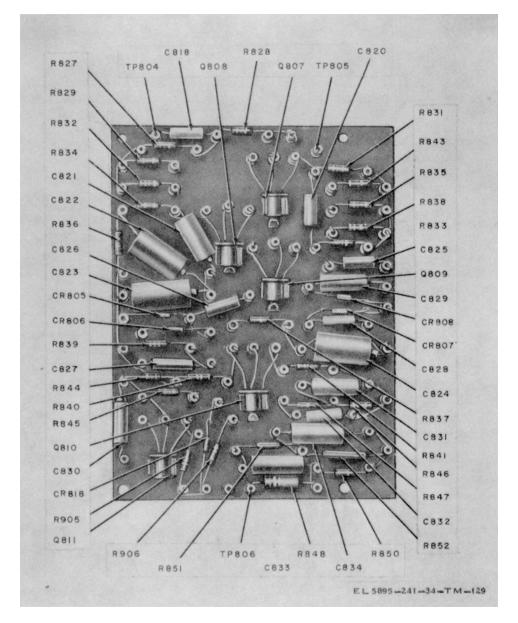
Amplifier Assembly AM-2827/FSW-8, terminal board TB802, parts location.
